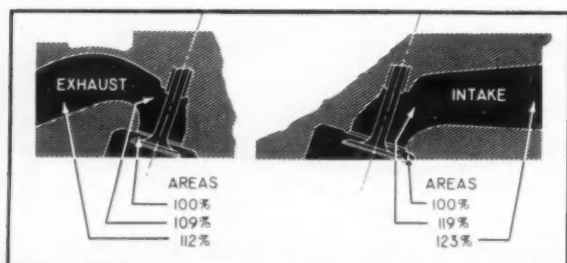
The intake and exhaust port areas provide a smoothly balanced transition in relation to the valve opening.
